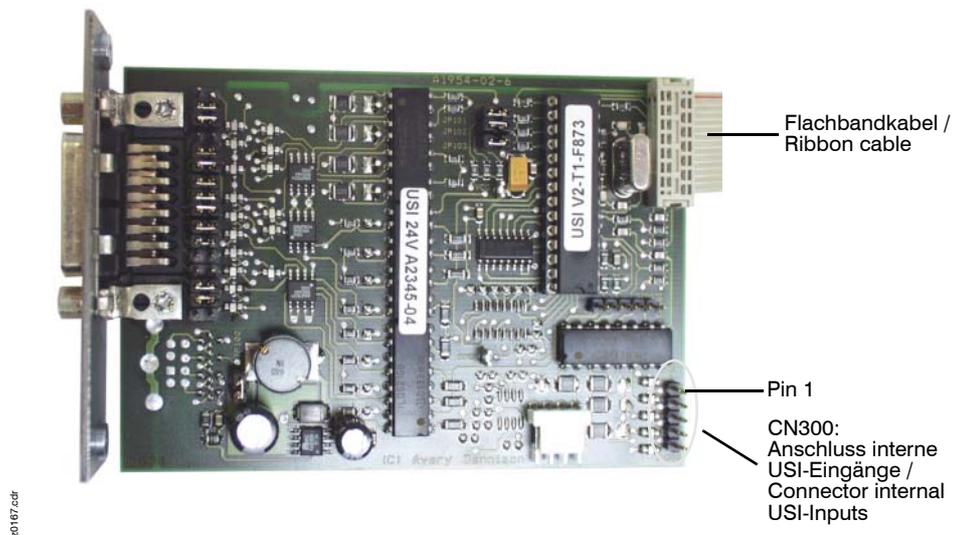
Pin 1 is the first pin in direction of the ribbon cable; the writing CN300 Pin 1 can be found beside the pins on the USI board.
